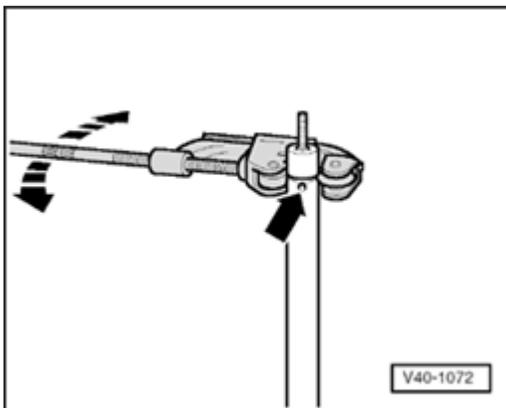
Cutting Through Outer Tube Using Pipe Cutter
